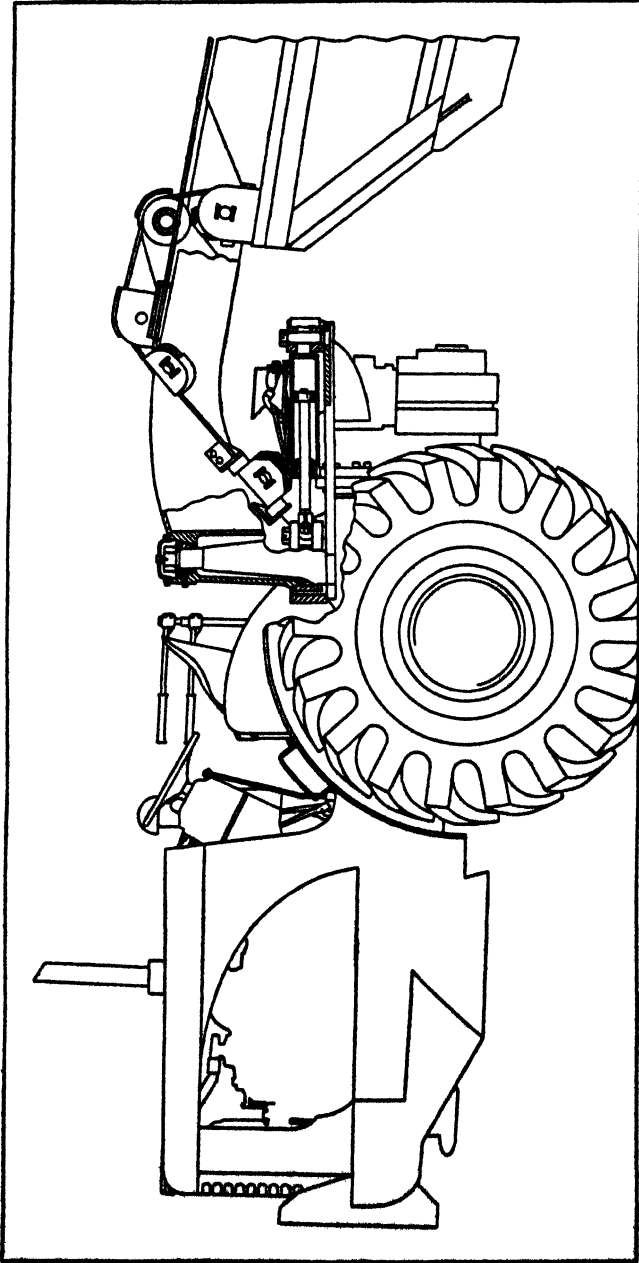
SIDE ELEVATION OF HEILNER TWO-WHEEL TRACTOR AND FORWARD PART OF DUMP TRUCK.
